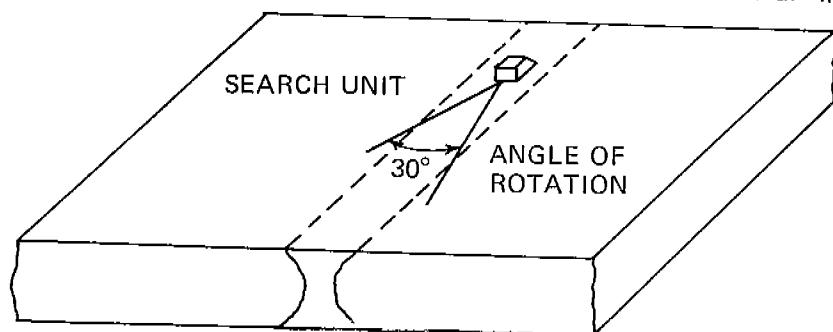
Supplementary Technique for Inspecting Butt Welds when the Weld Bead is Ground Flush
